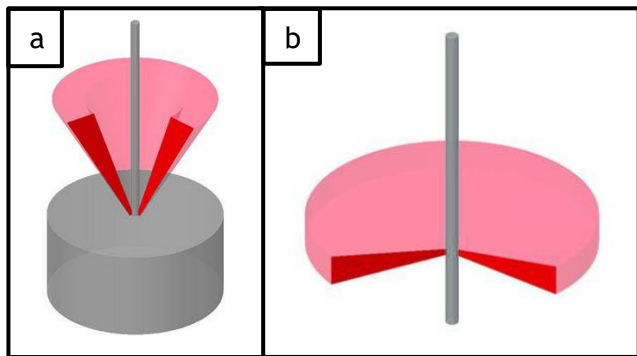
The laser shape is set depending on the component to manufacture [8] - picture credit: Nyfors
